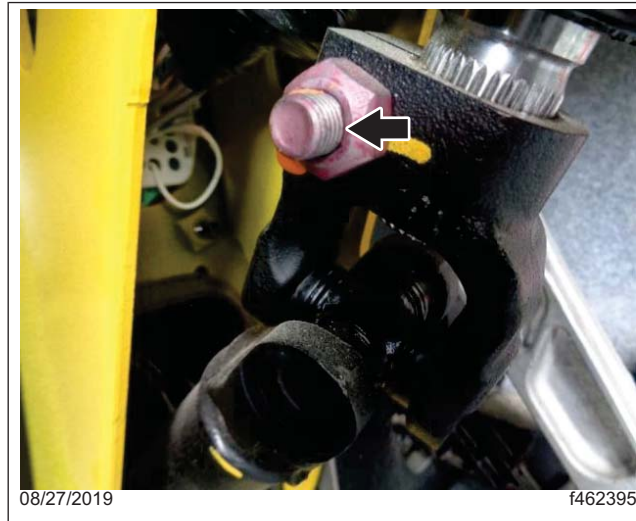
, Inspecting the Nut and Bolt for Exposed Threads
